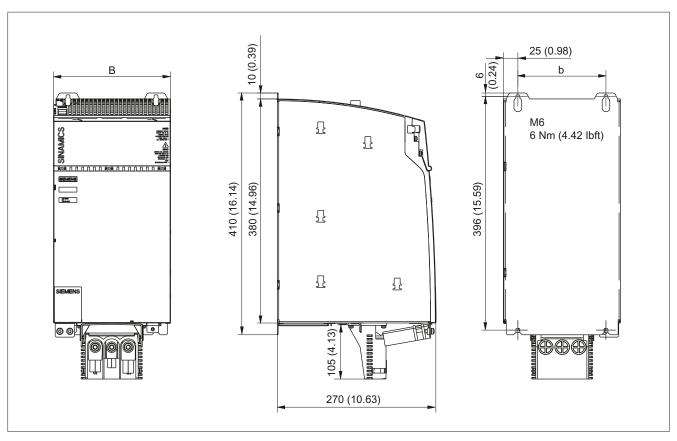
Dimension drawing of Motor Module Booksize with internal air cooling 45 A to 85 A, all dimensions in mm and (inches)
